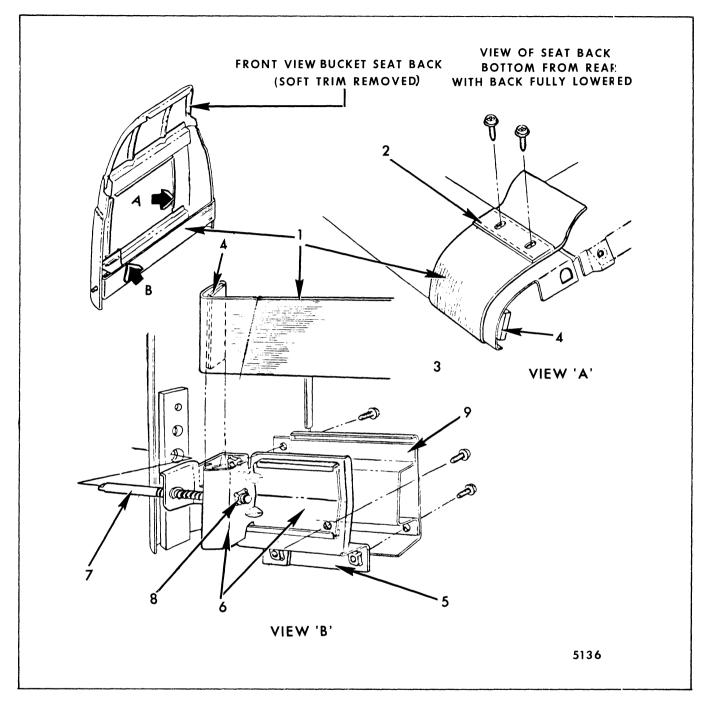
Custom Comfort Bucket Seat Back Lumbar Support Guide Assembly and Strap
